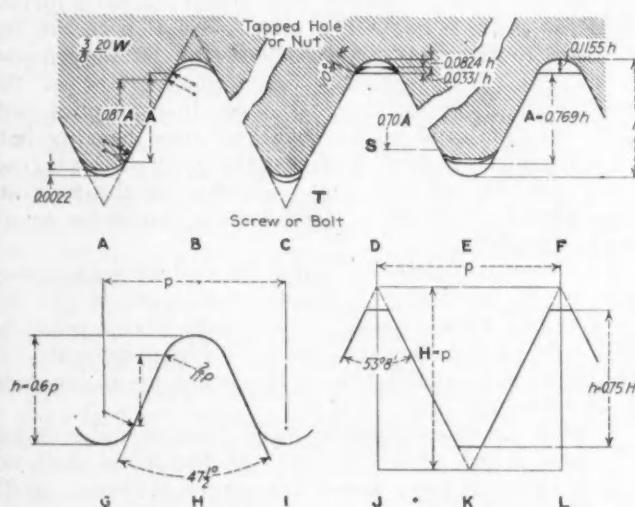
ILLUSTRATING CLEARANCES PROVIDED BY DIFFERENT MANUFACTURERS
